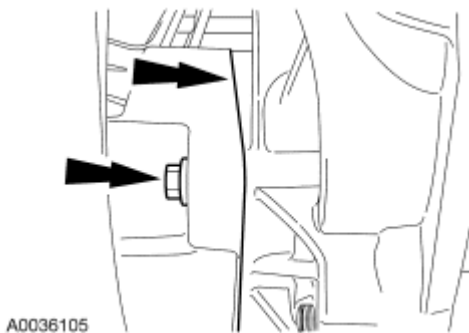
Locating Transfer Case Bolt & Transfer Case Unit
